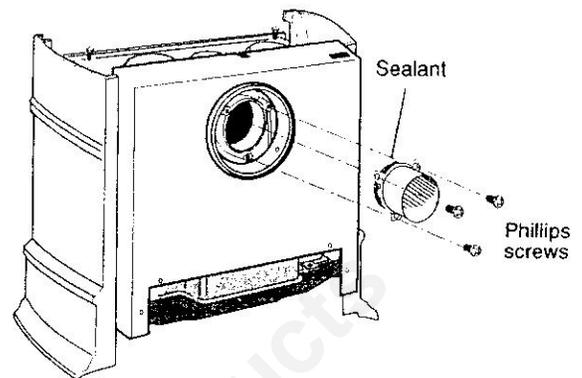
Apply sealant to the Starter Pipe, and fasten it with three phillips screws.
